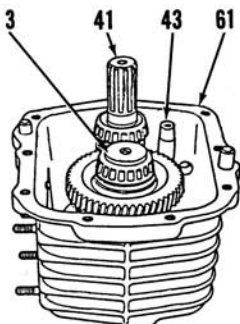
When disassembling KBW-10 transmission, first remove output shaft assembly (3) followed by intermediate shaft assembly (43) and input shaft assembly (41), in that order.
